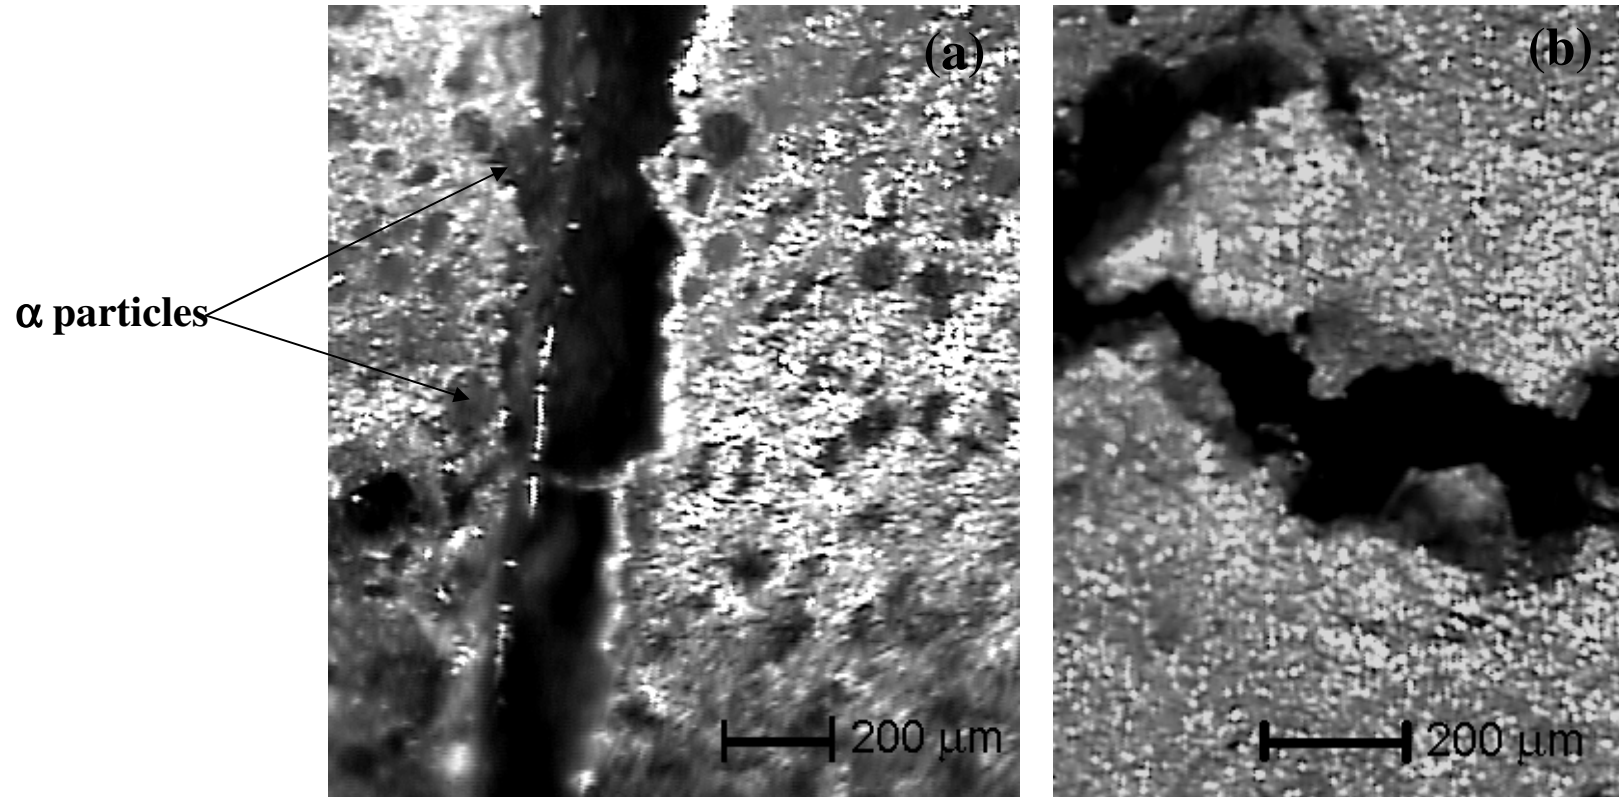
Observation of fracture surfaces of biaxially deformed samples shows that ABRC-processed material has more homogeneous structure (a) as-thixomolded, (b) ABRC-processed
